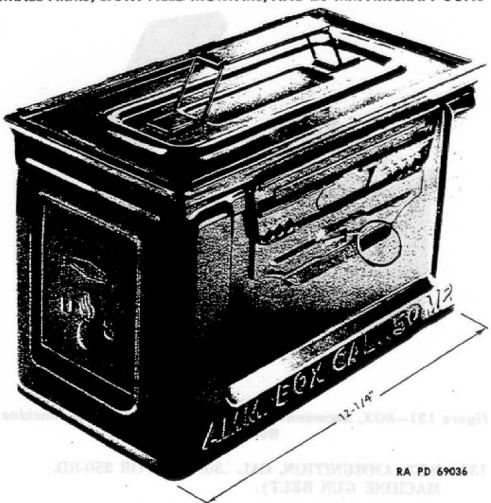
BOX, Ammunition, Cal. .50, M2 (for 110-rd. Machine Gun Belt)
